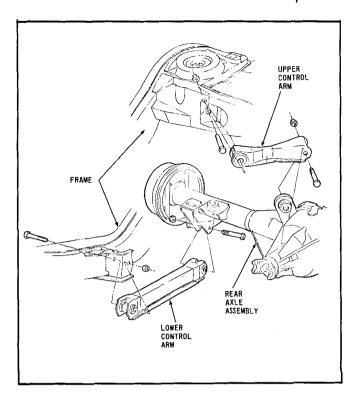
Installation of Control Arms (Coil Spring Suspension)
